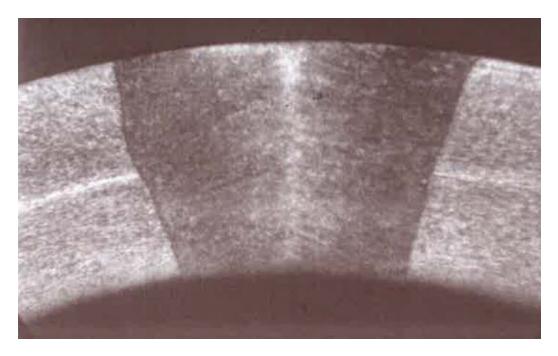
A metallurgical mount of the weld cross-section of a sample of straight length 0.50" OD tube was manufactured by a TIG (GTAW) welding process. Note that this weld shape is significantly different than in previous photos. It is less common in TIG welded tubes than that shown in Fig. 4. All samples are from the same tube manufacturer.
